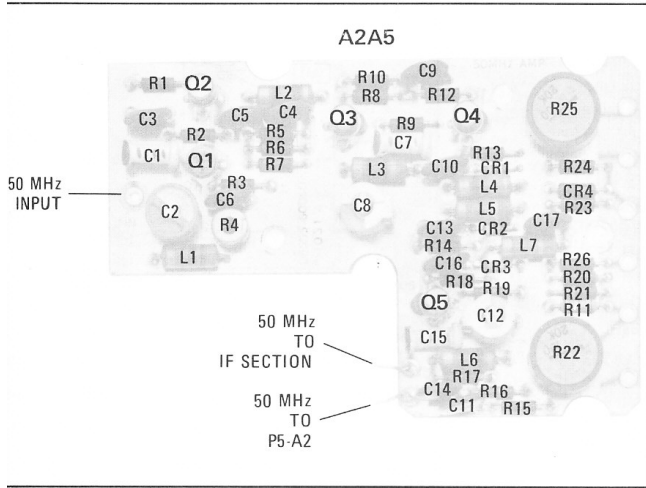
50 MHz Ampl. Assembly, A2A5
